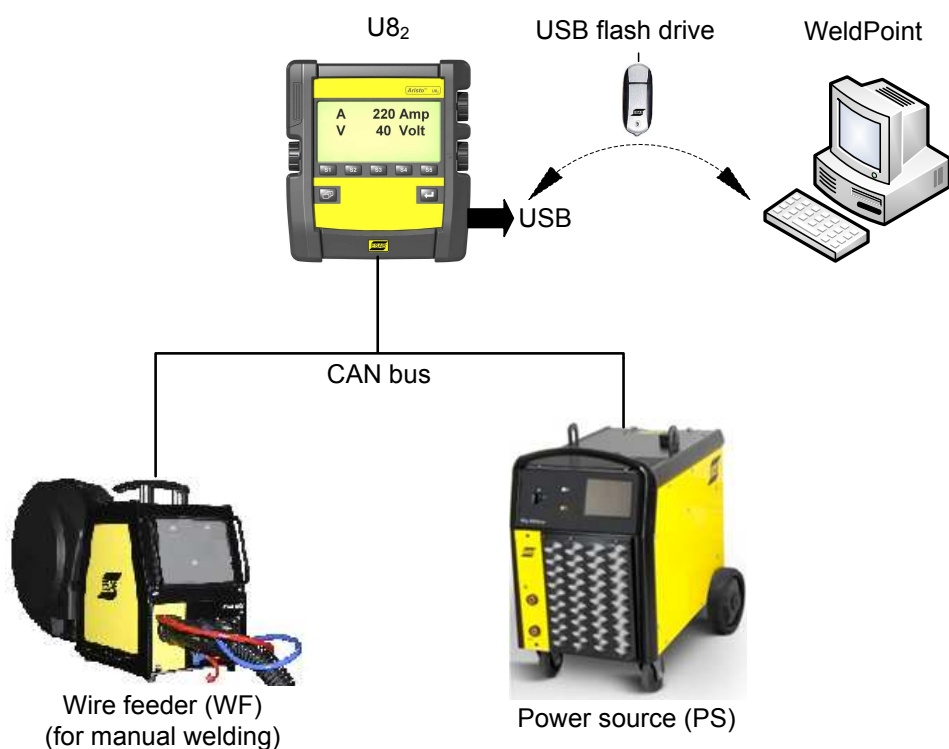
System overview of the customer's welding system for manual welding.
